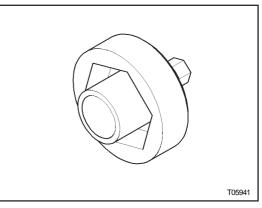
Hub nut socket (Van Hool ordering No.10732280)
